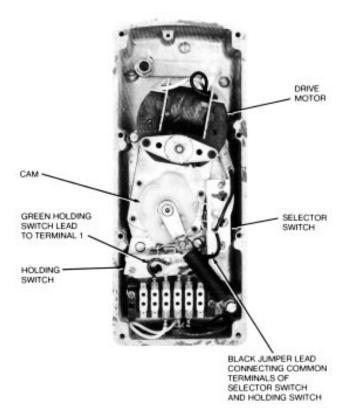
891000Kl Actuator mechanism equipped with holding switch.
